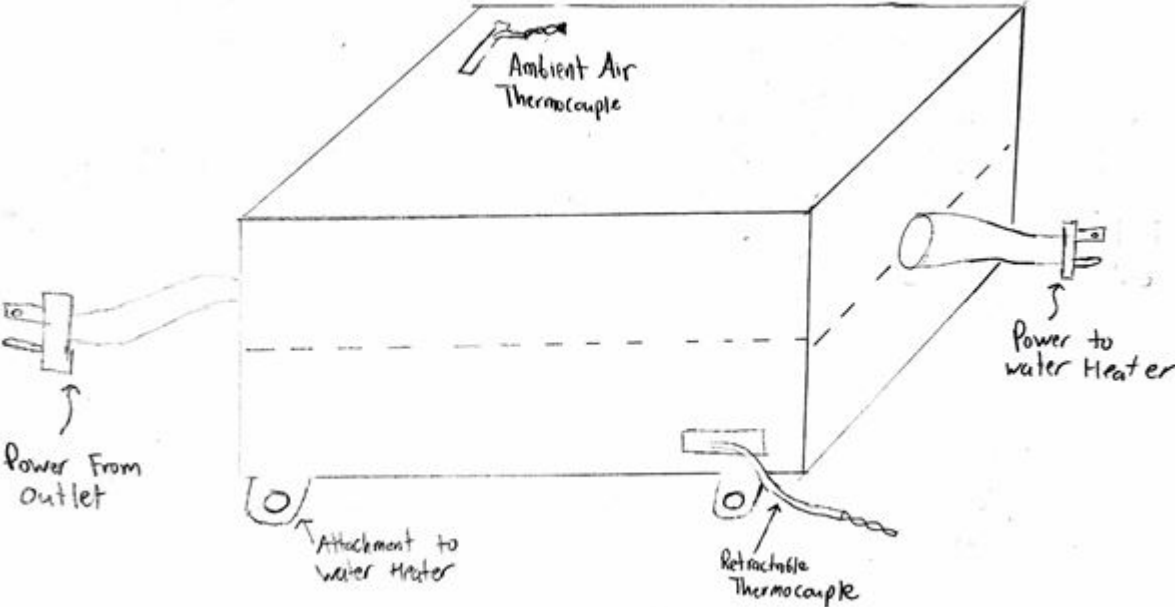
Initial Housing Sketch Drawn By: Scott Jansen
